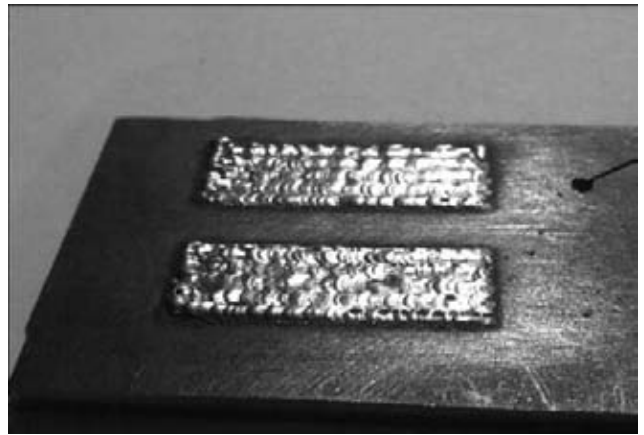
Workpiece of steel faced with the PG-SR3.4 powder containing carbon nanotubes
